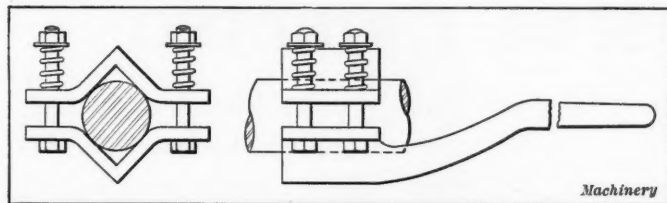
Tool with Spring Jaws for holding Work while being forged
